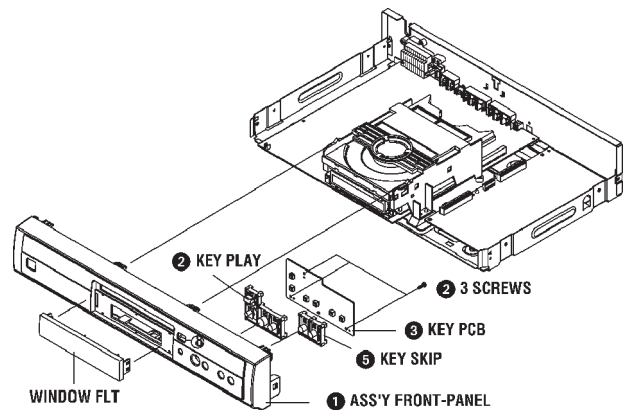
Removing Assembly Front-Panel and Key PCB
